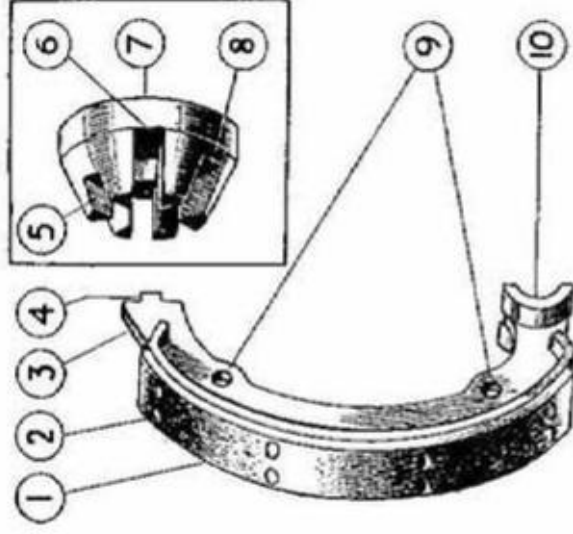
SHOWING 1945-7 BRAKE SHOE WITH THRUST COLLAR ADJUSTMENT
